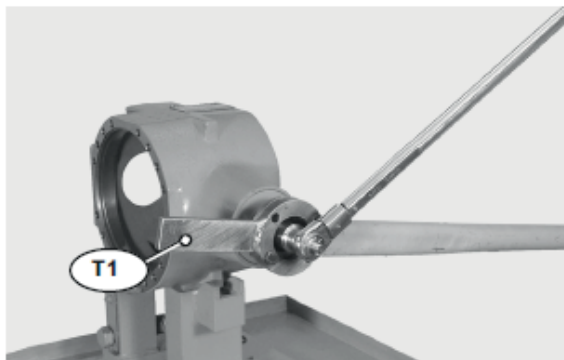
Lock the wrench T1 (See drawing T1 p. 258), rotate the pinion using a dynamometric wrench, up to a minimum required torque setting of 260 N-m.
